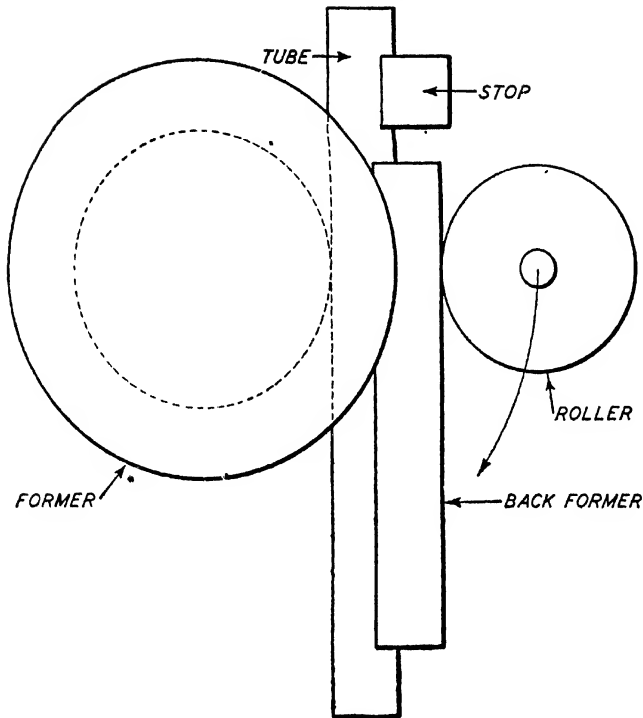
SET-UP OF TOOLS FOR BENDING LIGHT-GAUGE TUBES ON A UNIVERSAL BENDER
